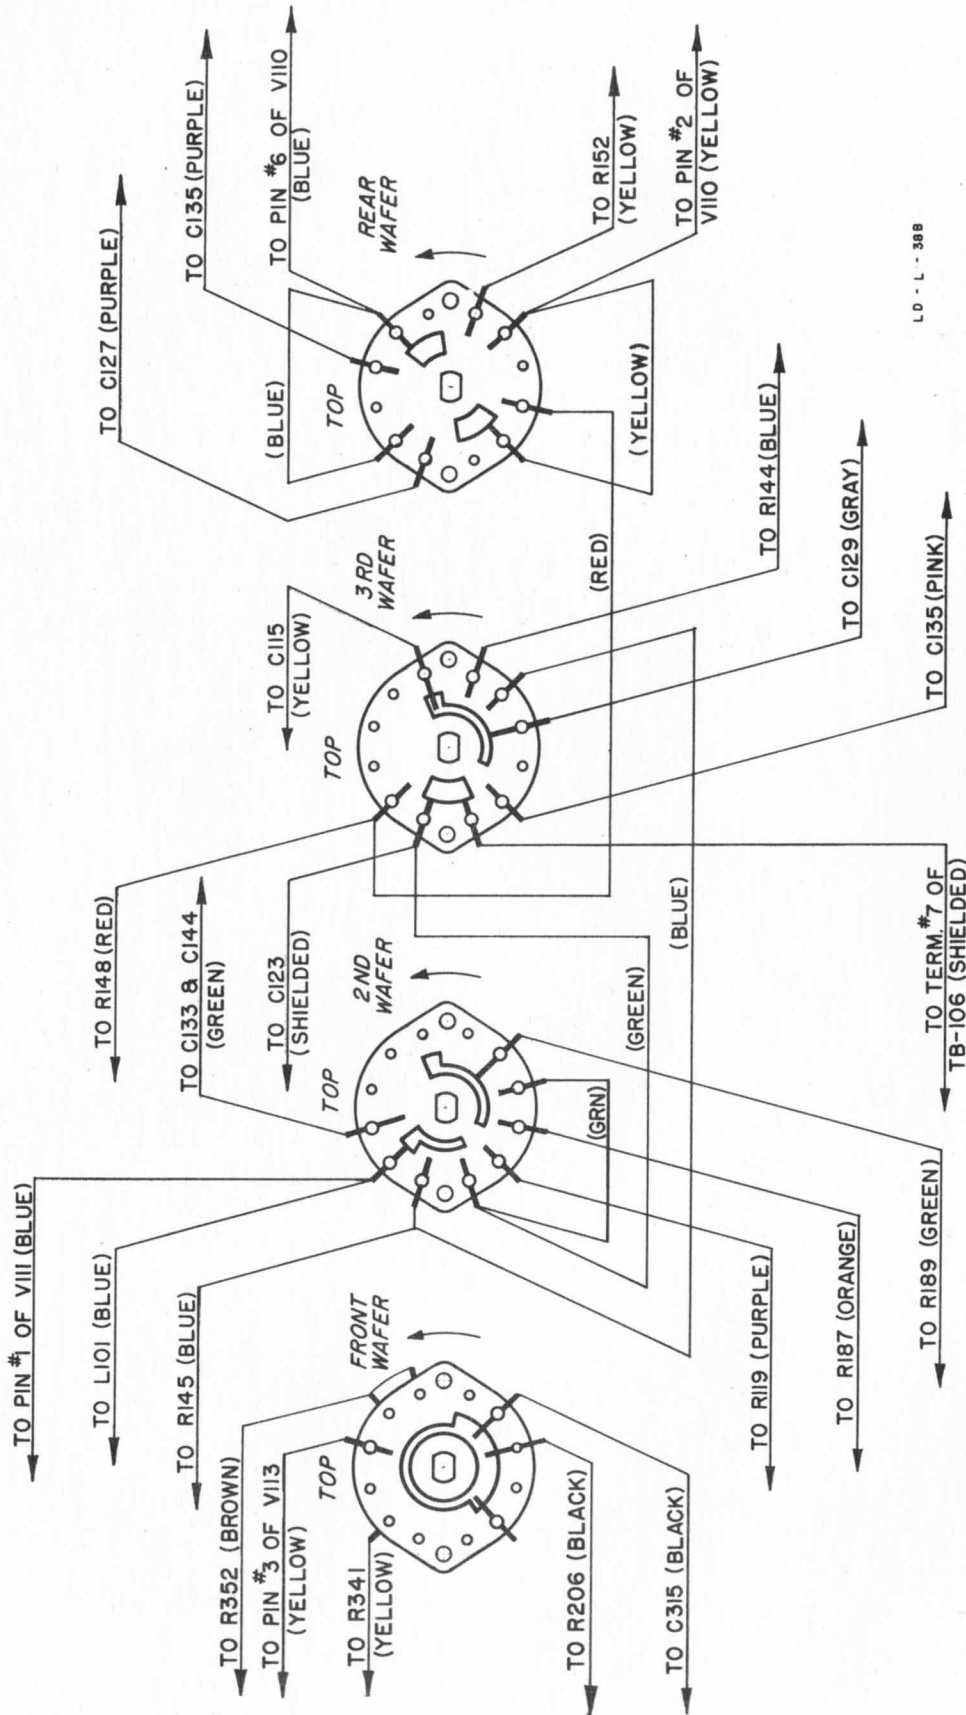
MOD SELECTOR Switch S102 Wiring Detail
